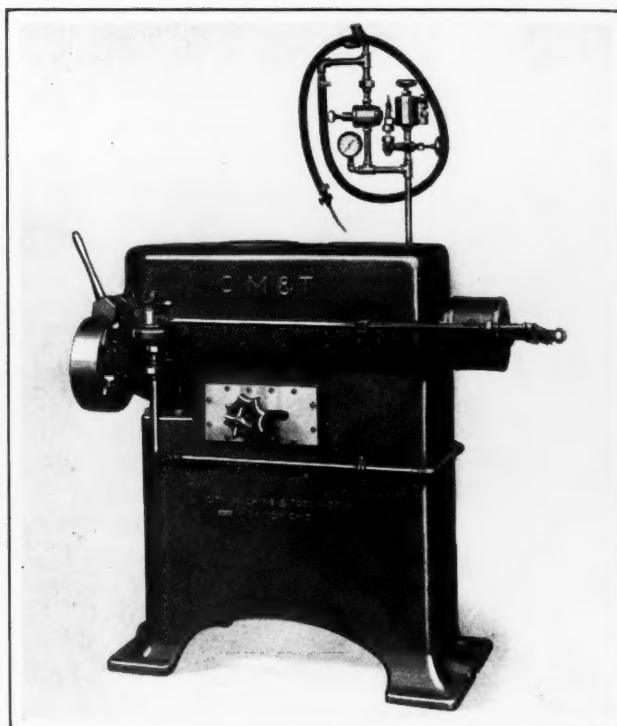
Bolender Gear Burnishing Machine with Air Control
